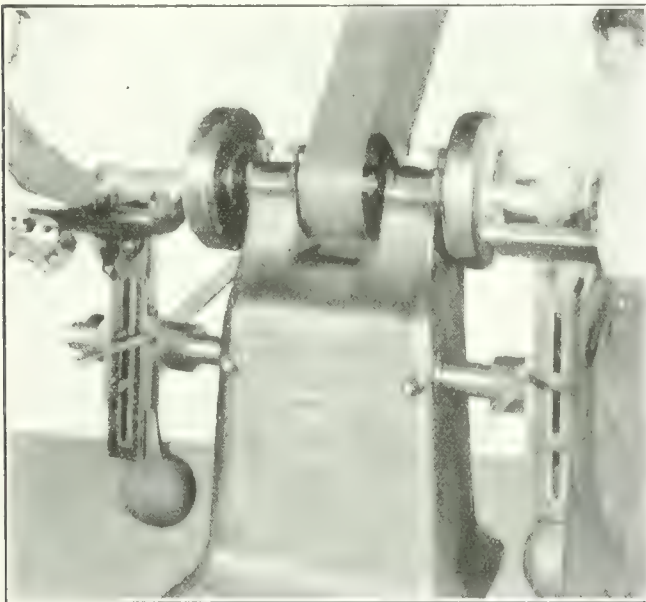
GRINDER WITH WATER HOODS AND PIPING REMOVED.
